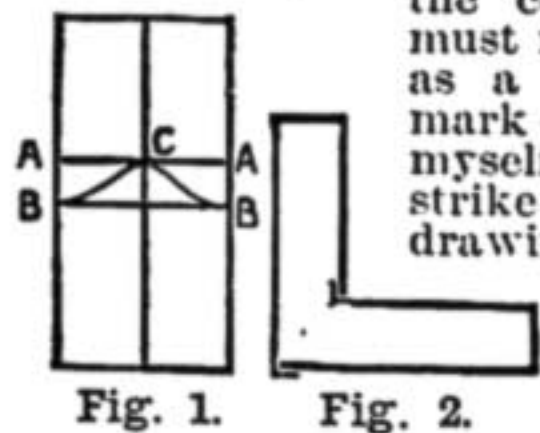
Making Elbow. Fig. 1.—Elbow marked out. Fig. 2.—Ditto put together.
